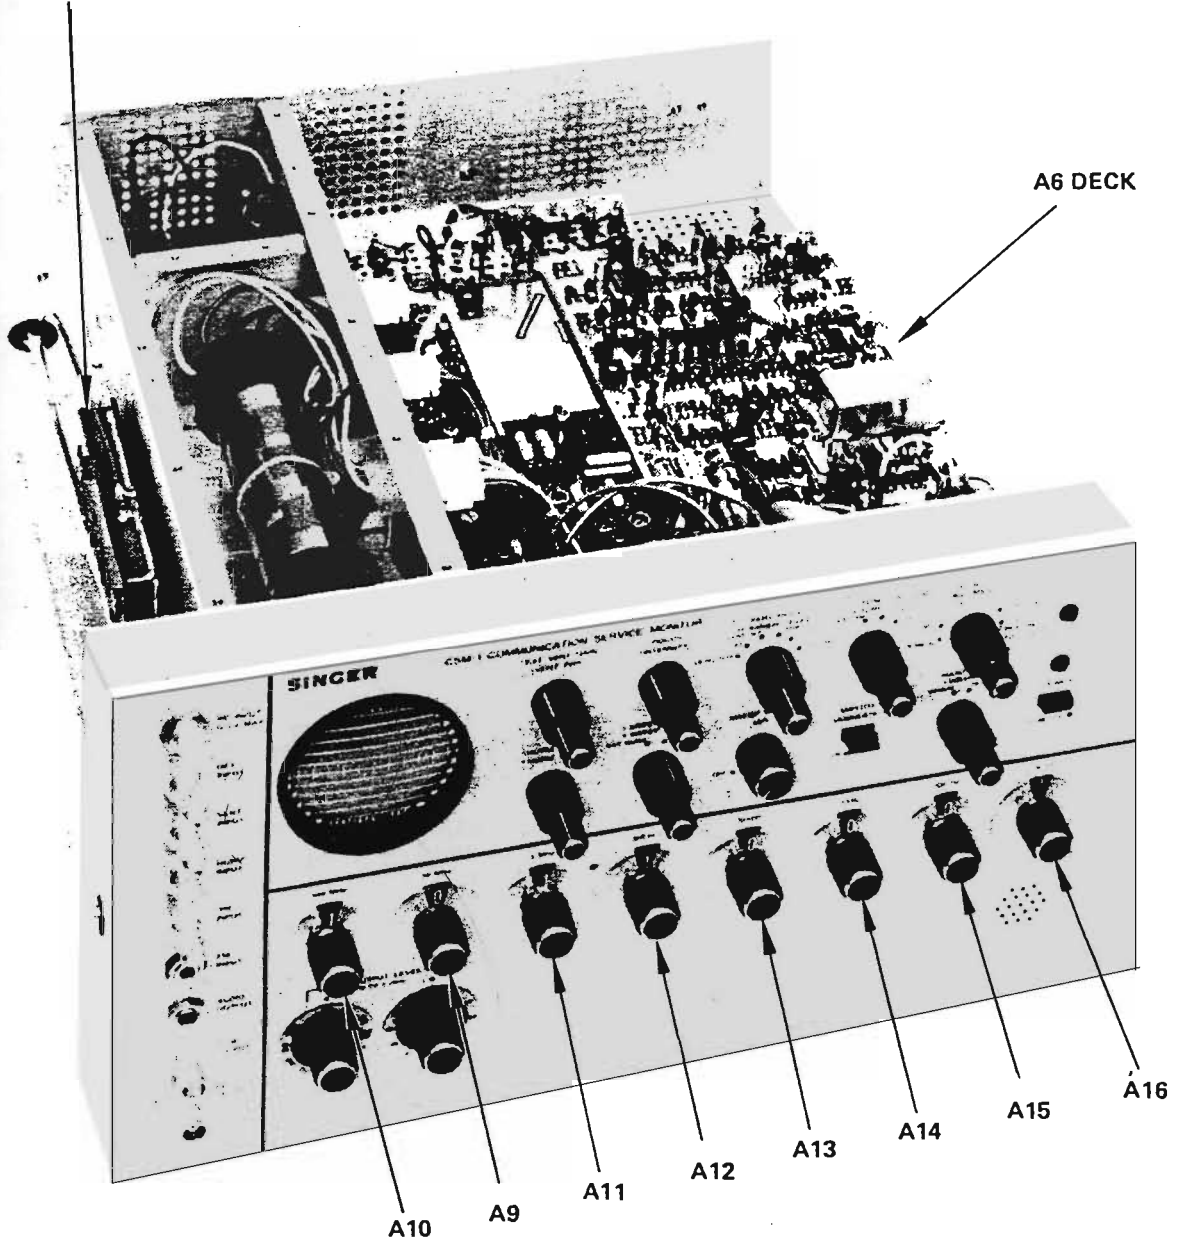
Assembly Location, Model CSM-1 Isometric View, Cover Removed
